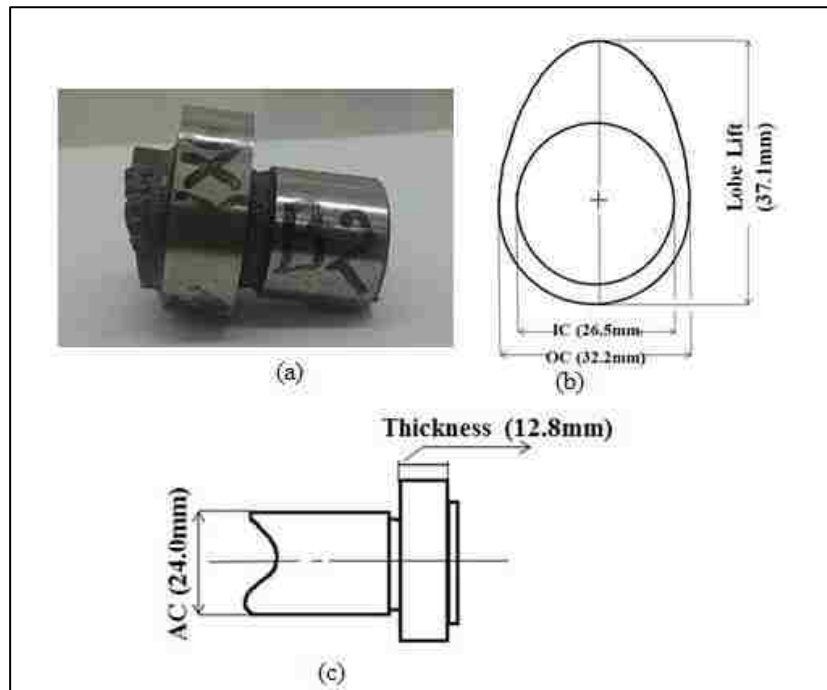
Shape and geometry of camshaft lobe, (a) sample B2 with X marked to indicate the position for RA and RS measurements; (b) cam lobe dimensions and geometry; (c) dimension and geometry of cam lobe section.
